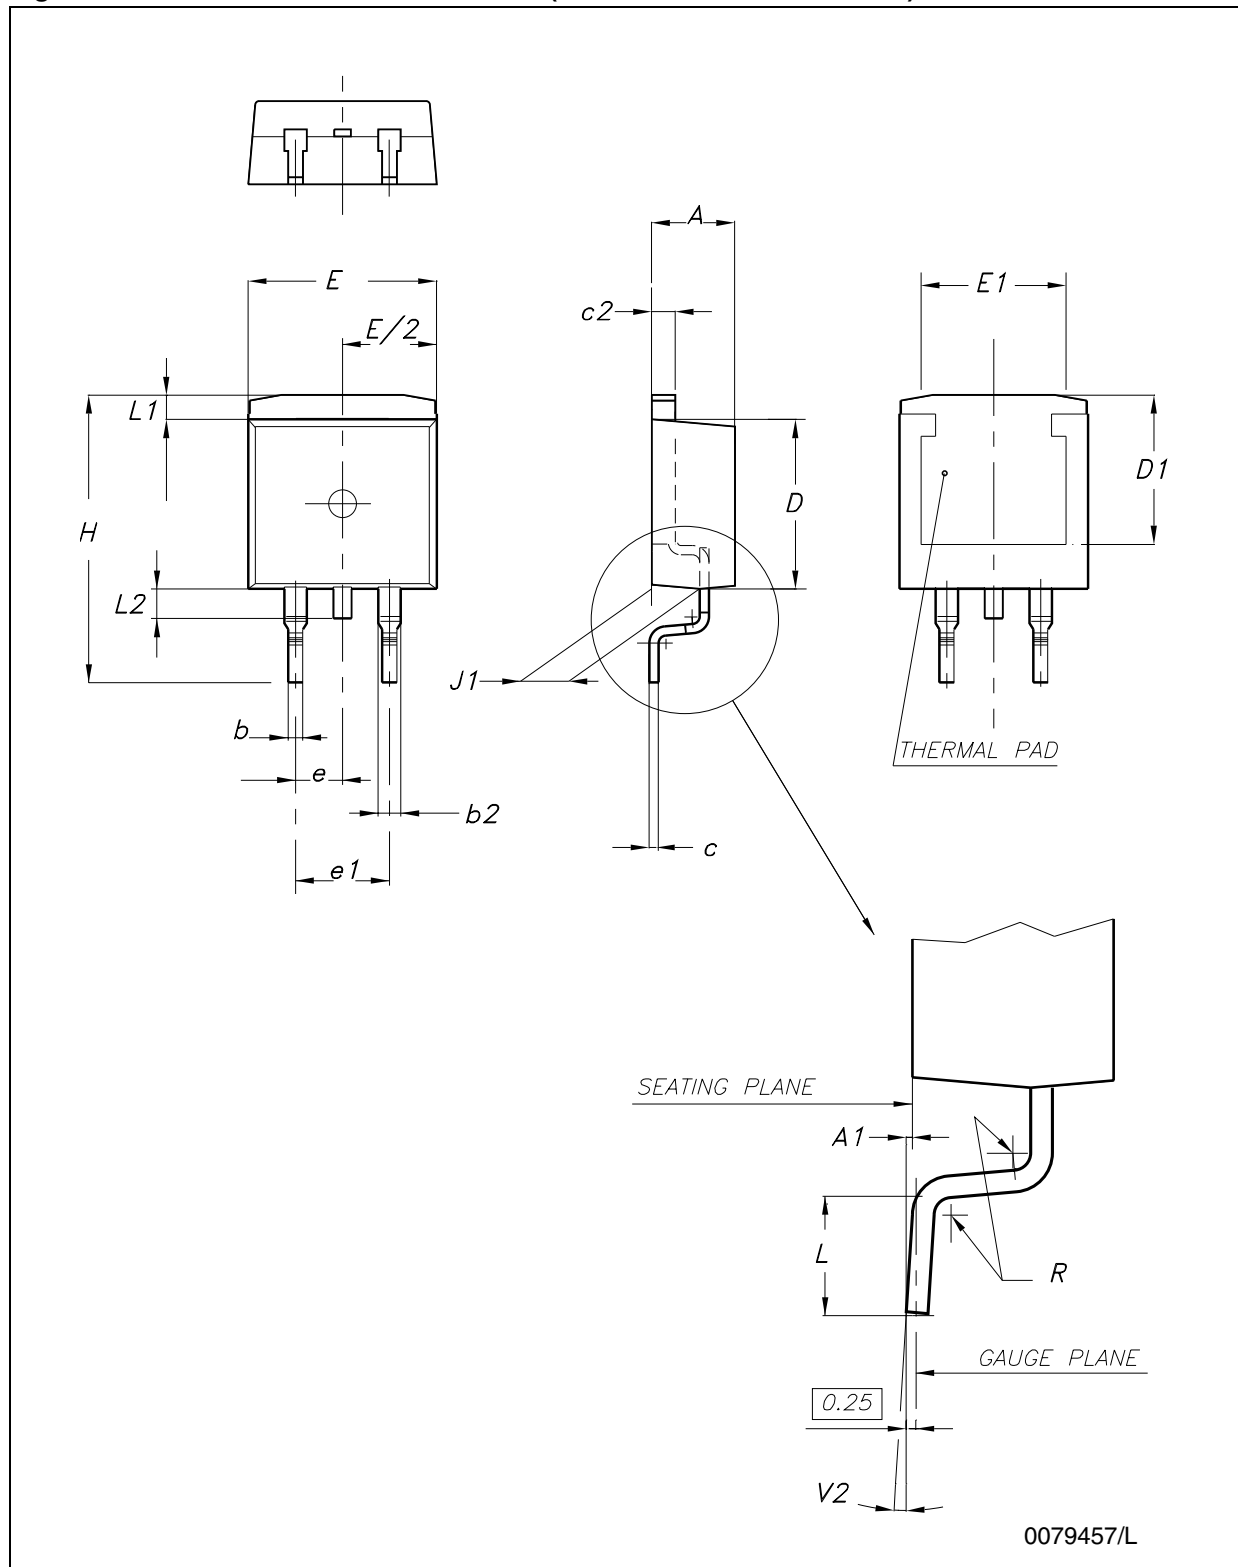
DRAWING DIMENSION D²PAK (TYPE WOOSEOK-SUBCON.)
